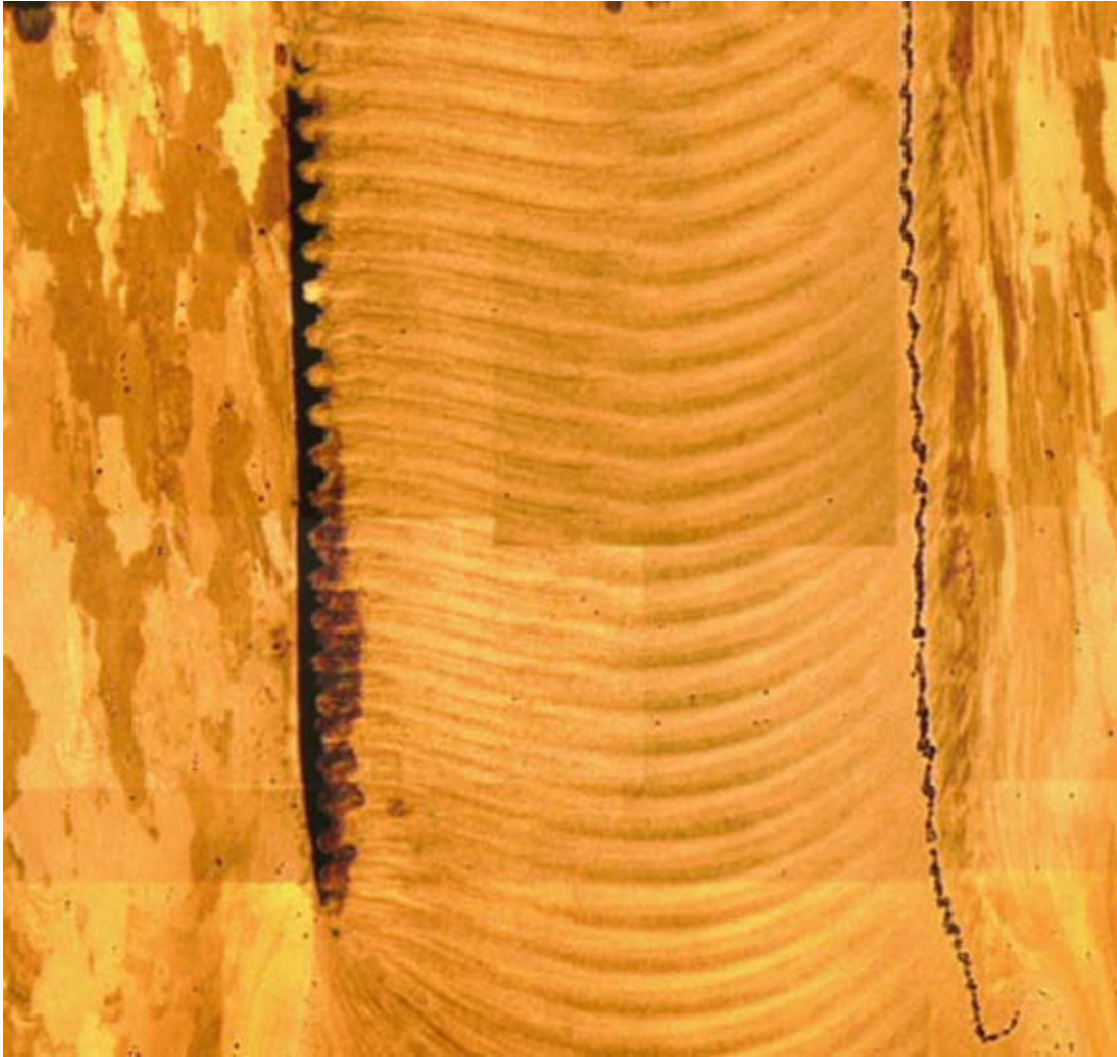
Plan View of Anodized to Unanodized Al-Li alloy, weld location on the retreating side with a Tri-Flat tool. (sample 1107)
